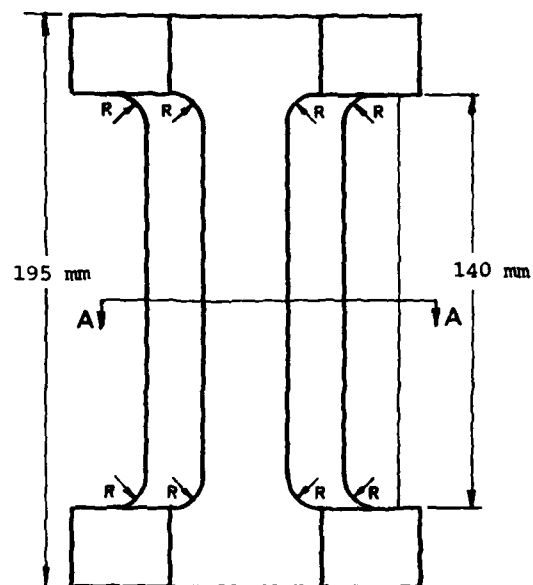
(a) DIMENSIONS OF TEST SPECIMEN
